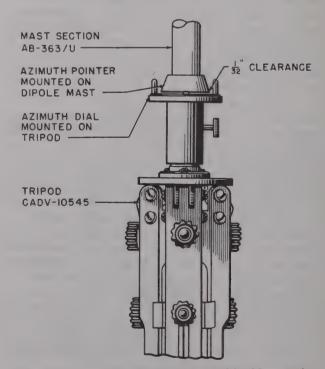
Azimuth Dial Assembly Mounted on Tripod CADV-10545
